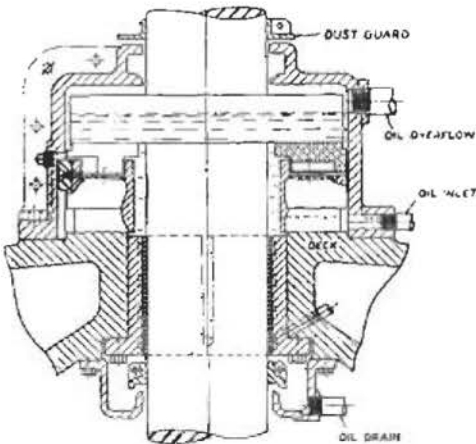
Simple vertical mounting for Style N, J or B single thrust bearing. Collar is integral with shaft. Forced lubrication is used. See Figure 44, Page 34, for circumferential location of oil inlet.
